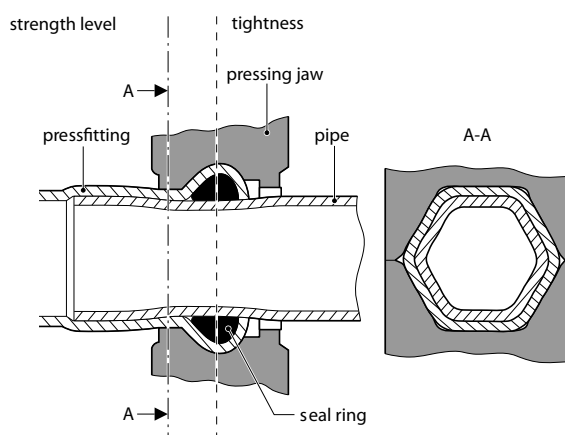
Section through a pressfitting joint with the pressing jaw (hexagonal pressing contour) still in position.
